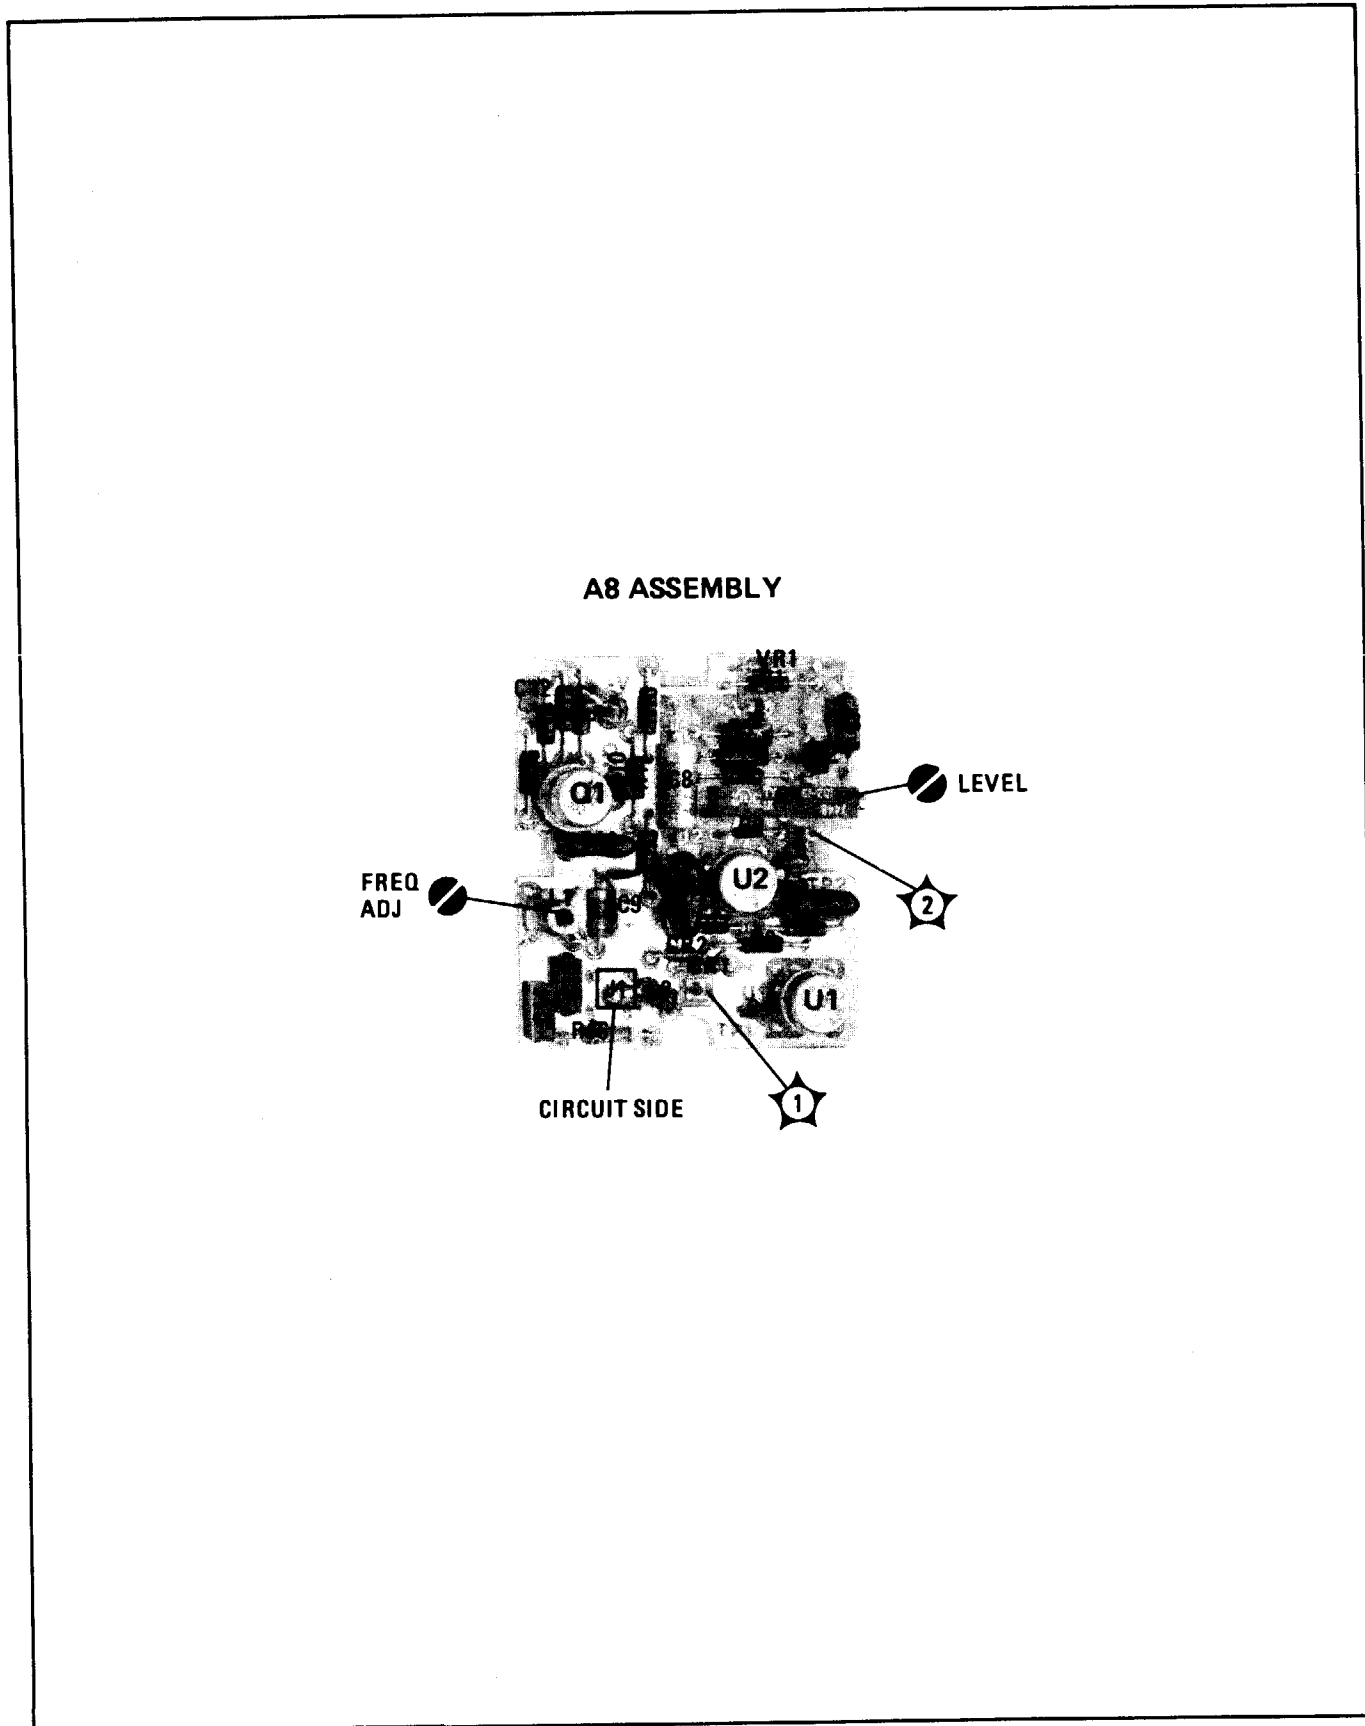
A8 Power Reference Oscillator Assembly Component, Test Point, and Adjustment Locations
